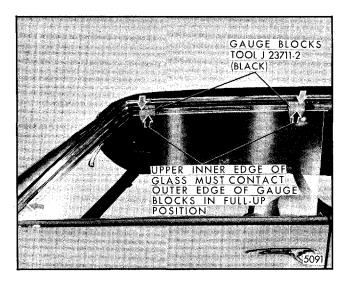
Door Window - In and Out and Up-Travel Alignment - E Styles
